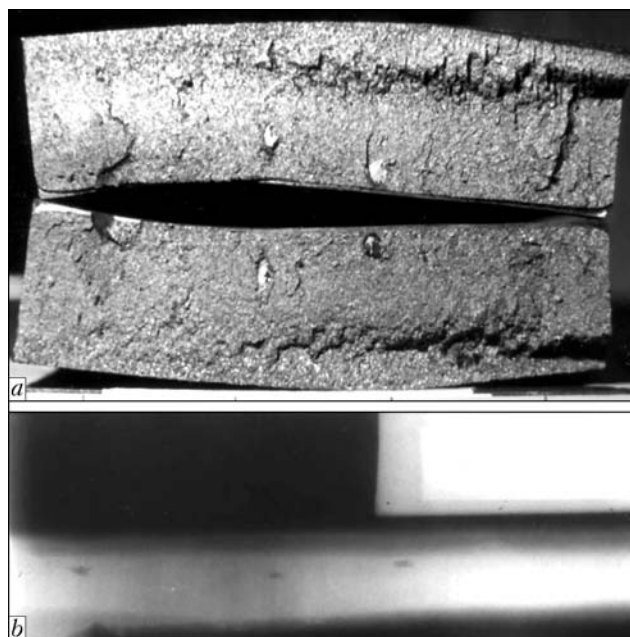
Fracture of the welded joint produced with inadmissible deviations of welding process parameters (a), and X-ray pattern of the joint before fracture (b)
